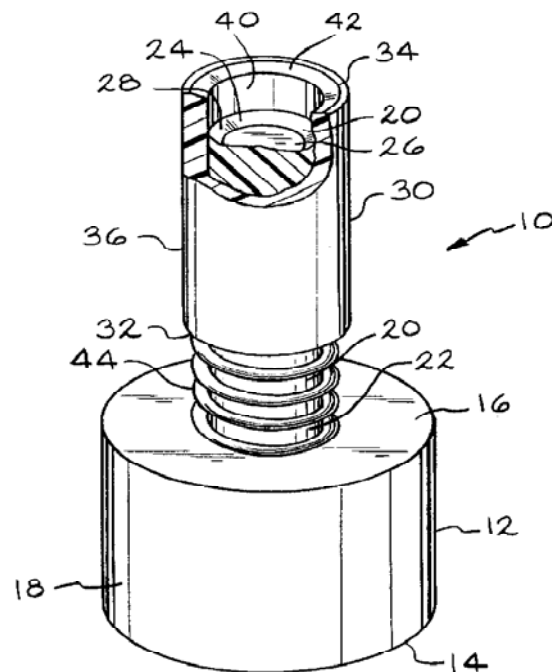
Face Seal O-Ring Insertion Tool
